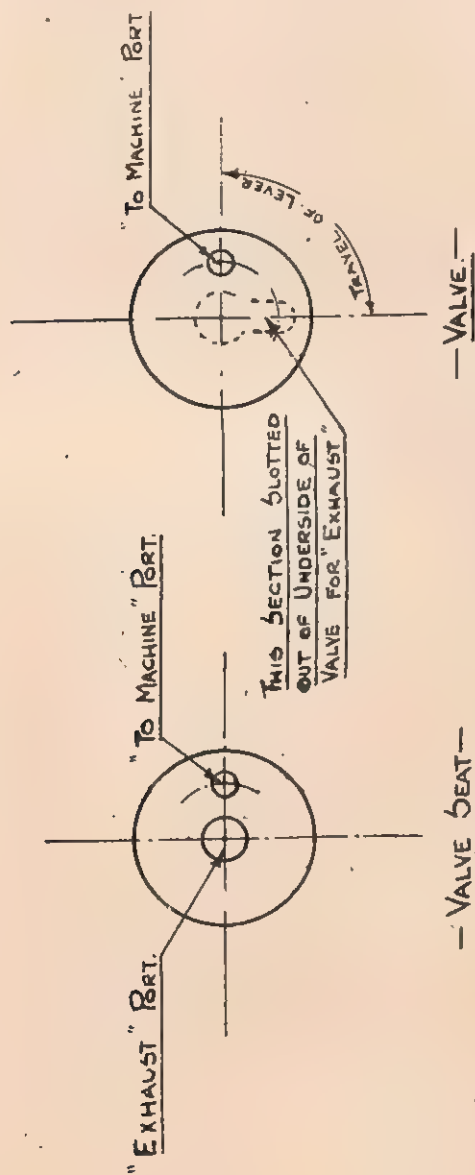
Valve and Seat for Single-Acting Rotary Face Valve.
